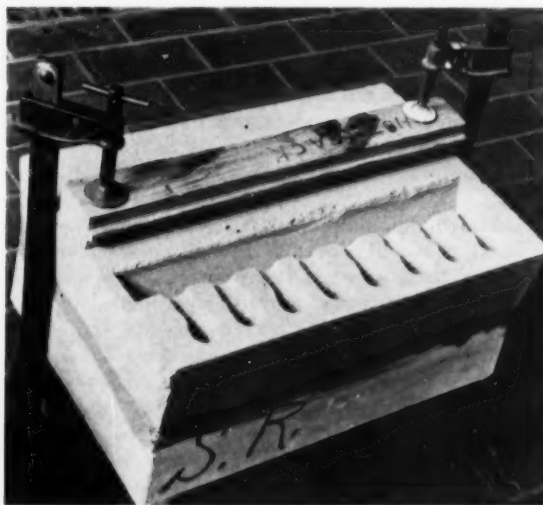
An assembled hot cracking test mold. Each of eight test castings was individually poured. The overflow basin adjoining the sprue cups was provided to facilitate rapid pouring.
